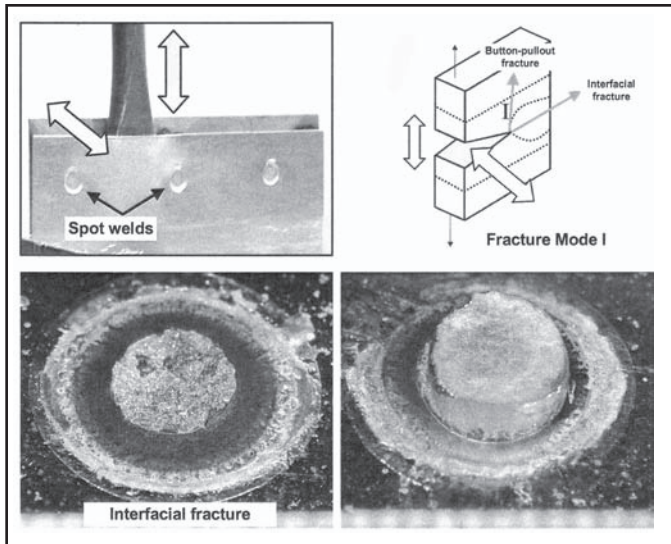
Description of the chisel test, analogy with a fracture mode-I test, and the two major types of weld fracture seen during the test.
